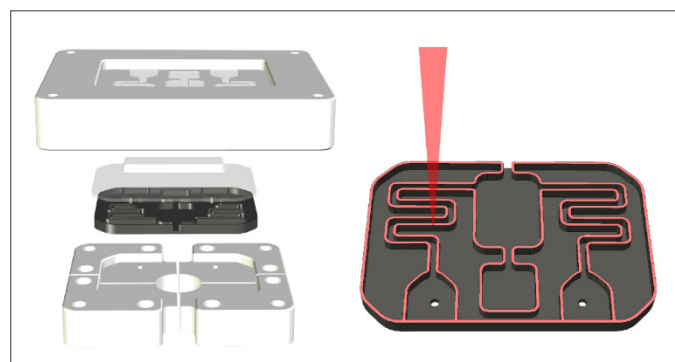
Lab on a chip is a fast growing application for plastic welding.
